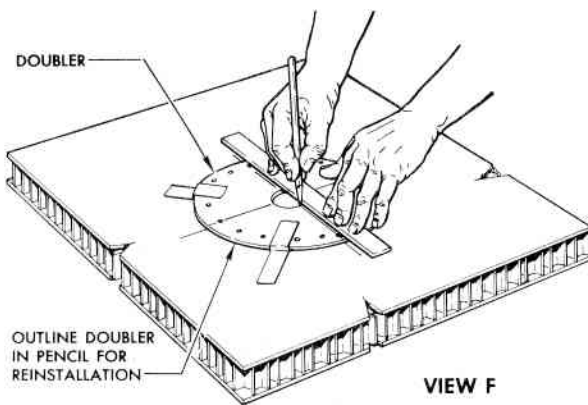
Honeycomb Repair No.14 — Hole (Sheet 1 of 3)
